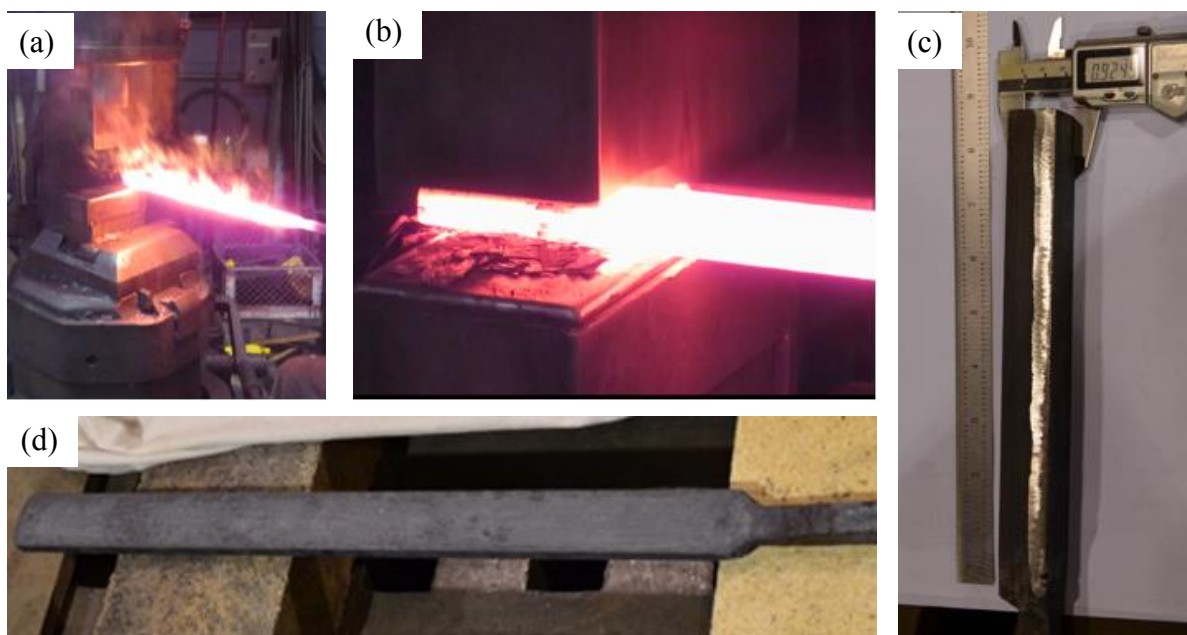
Laminating the low and the high carbon steel together and forge welding the strips using a power hammer.
